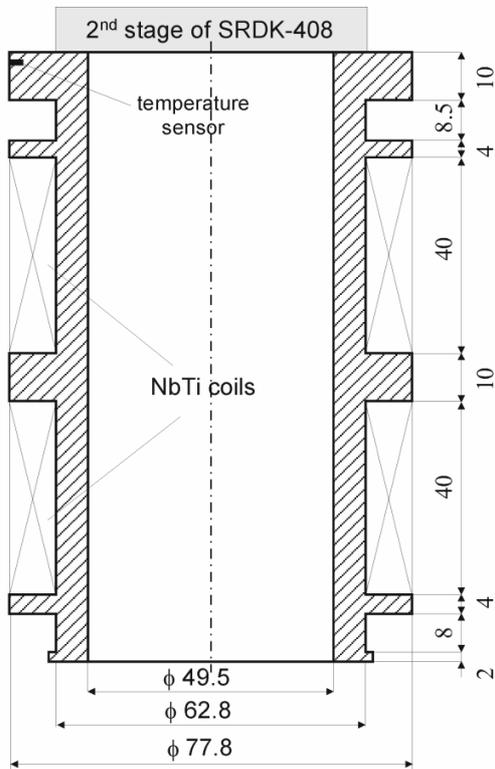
AL-alloy mandrel of the NbTi magnet. Dimensions in mm.
